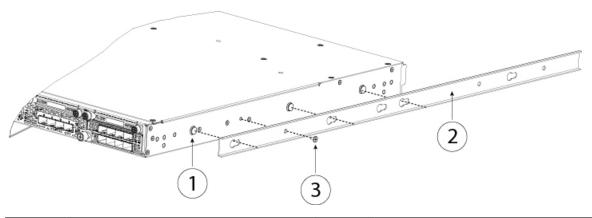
Install the Screws on the 2110/2120 Chassis and Line up the Inner Rail
